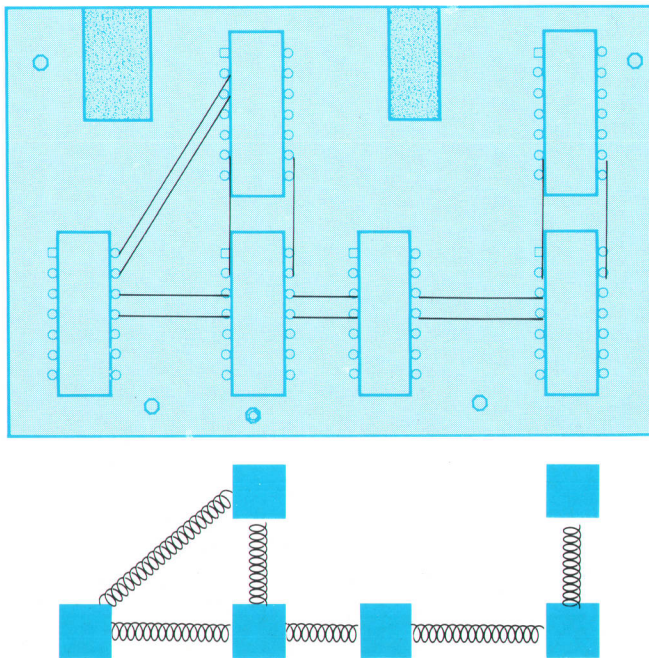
Force-directed placement is based on a mechanical analogy. (Top) Small printed circuit board. (Bottom) Mechanical representation of board.
